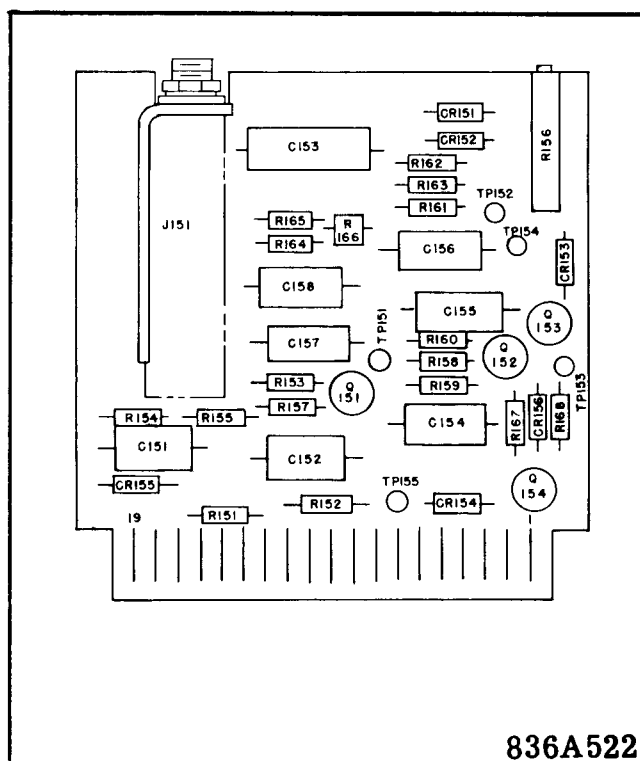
Component locations on the carrier level indicator printed circuit board.
